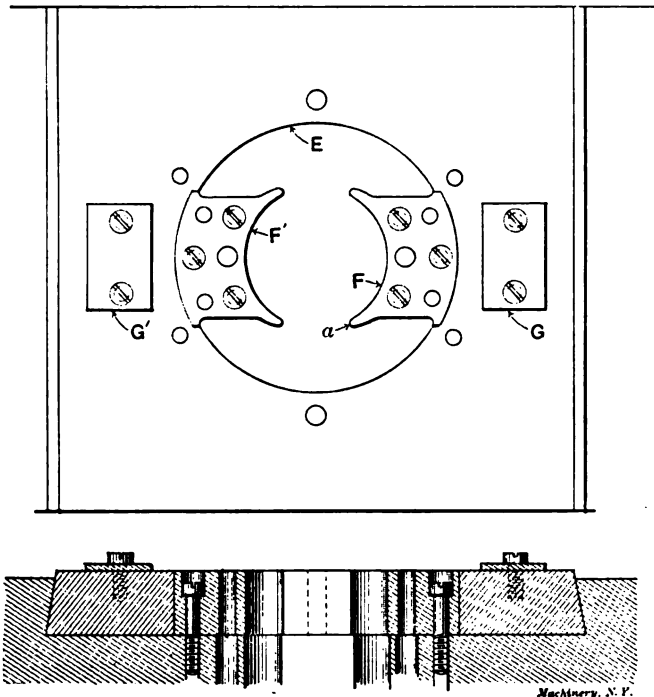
Die for Inside Shape and Holes of Blank in Fig. 38
